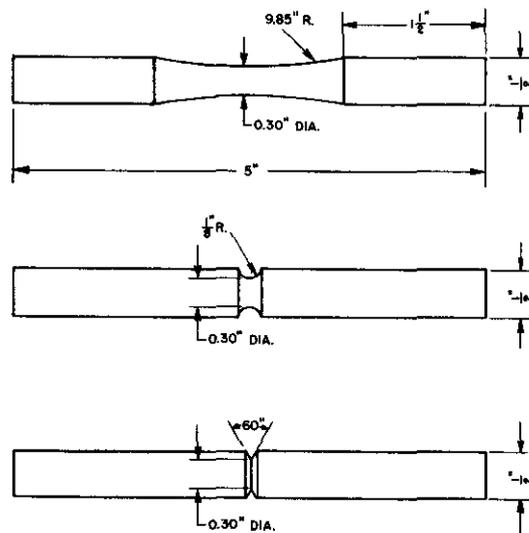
SPECIMENS FOR ROTATING BEAM FATIGUE TESTS.
